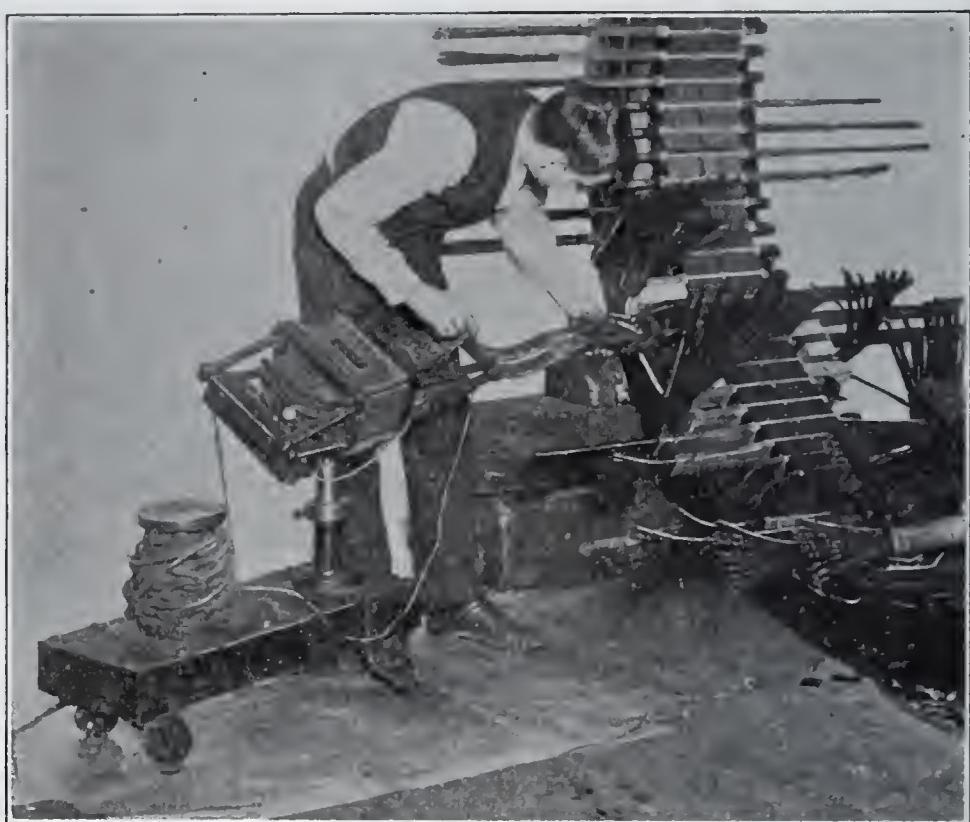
Thomson, or Incandescent, Electric Welding Apparatus.
